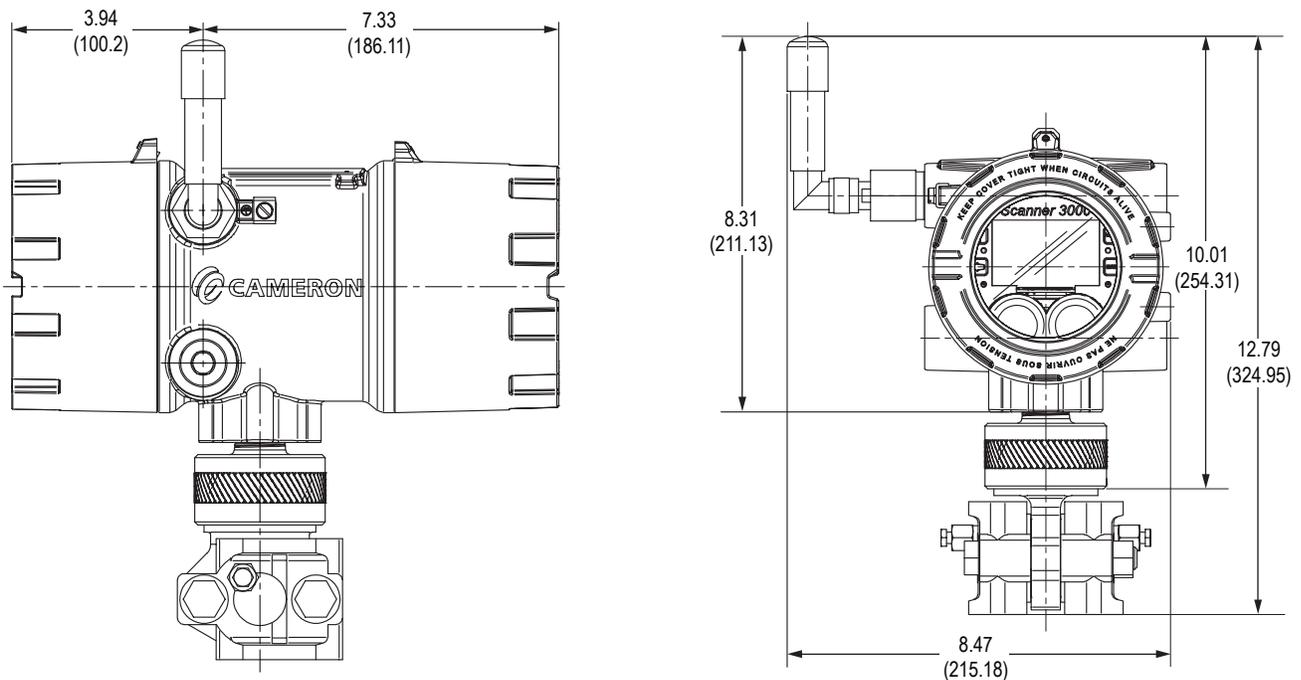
Wireless Scanner 3100 with MVT and direct-mount antenna; dimensions are shown in inches (mm)
